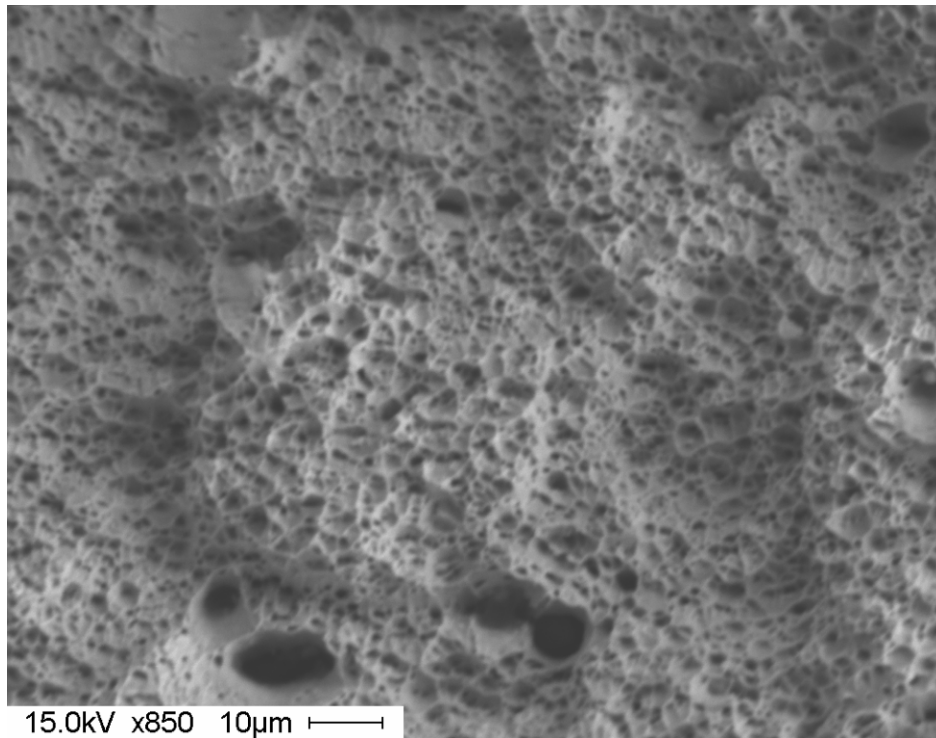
Quasi-static sample fracture surface closeup.
